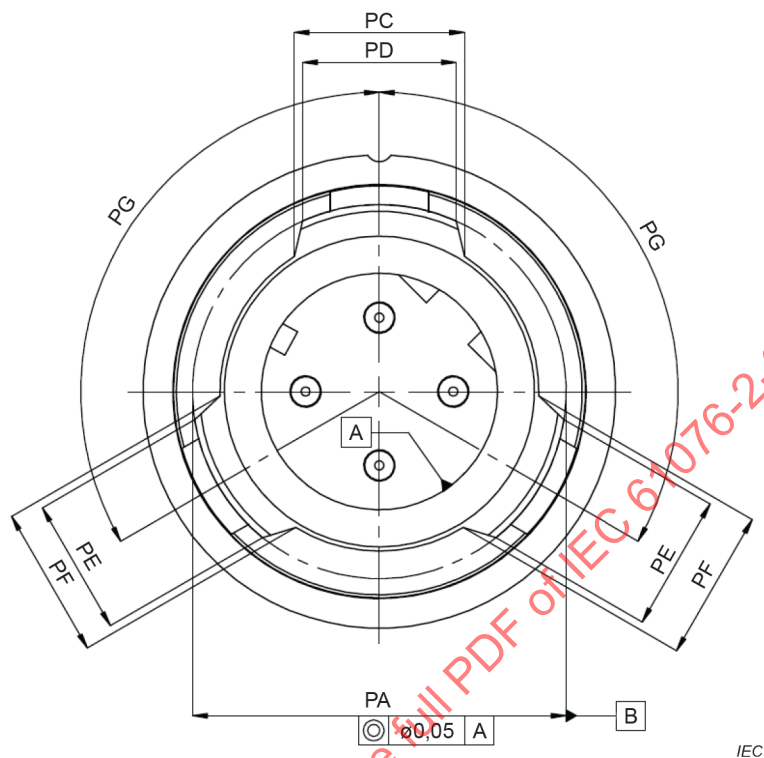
Front view of the male side of the push-pull housing using the example of a D-coded connector
